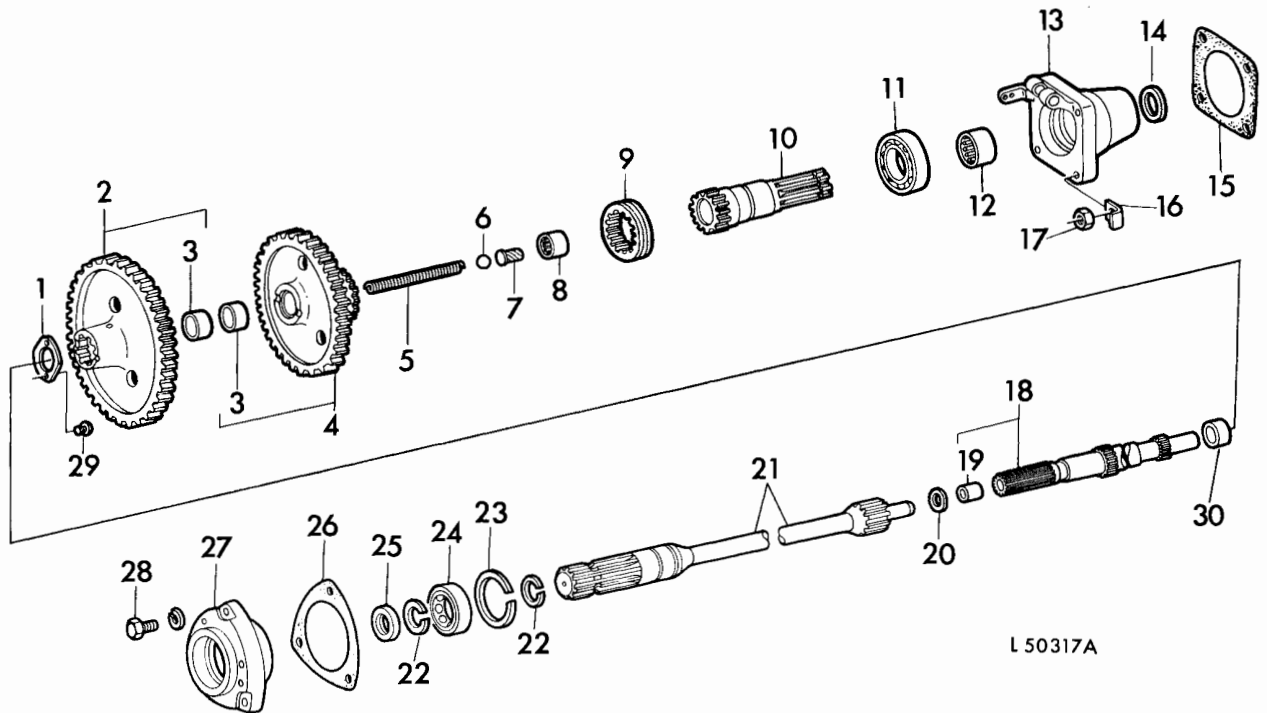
Exploded View of Rear 540 rpm and Mid 1000 rpm PTO Shafts
